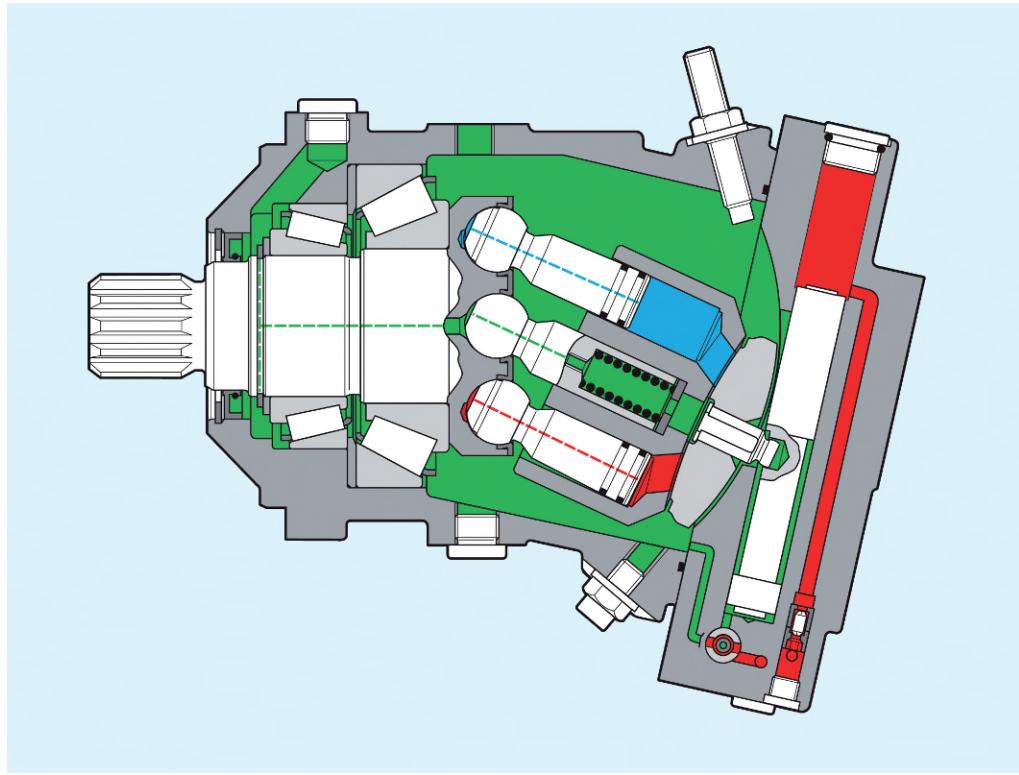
Section view of a variable axial piston motor type (Courtesy of Bosch Rexroth)
